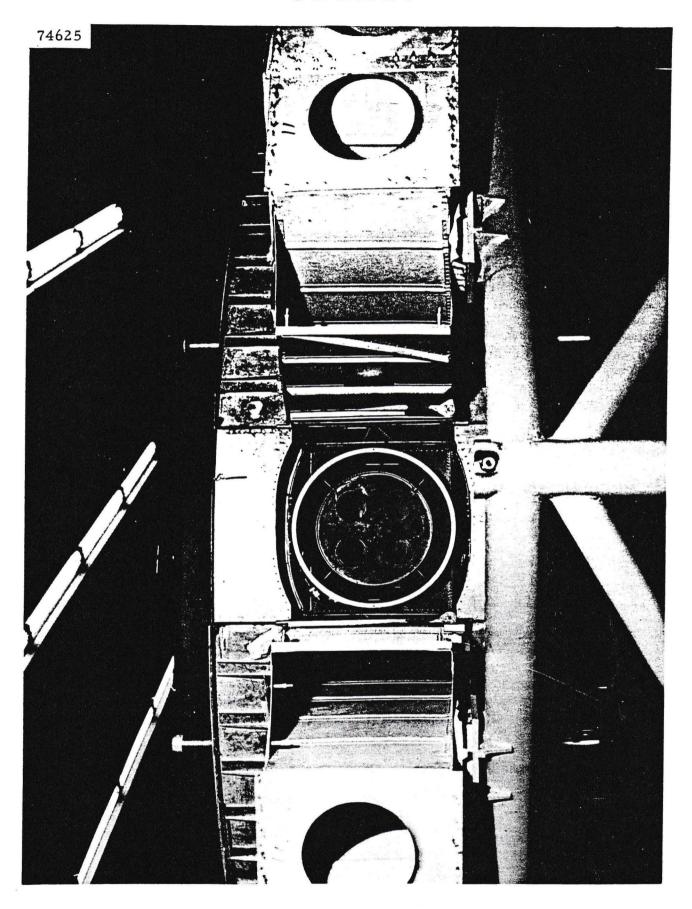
ENGINE BAY-AIRFRAME ASSEMBLY
